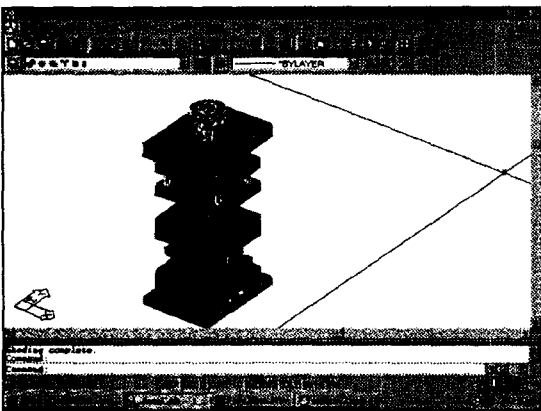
The 3D output drawing of the mold-base & mold parts.
